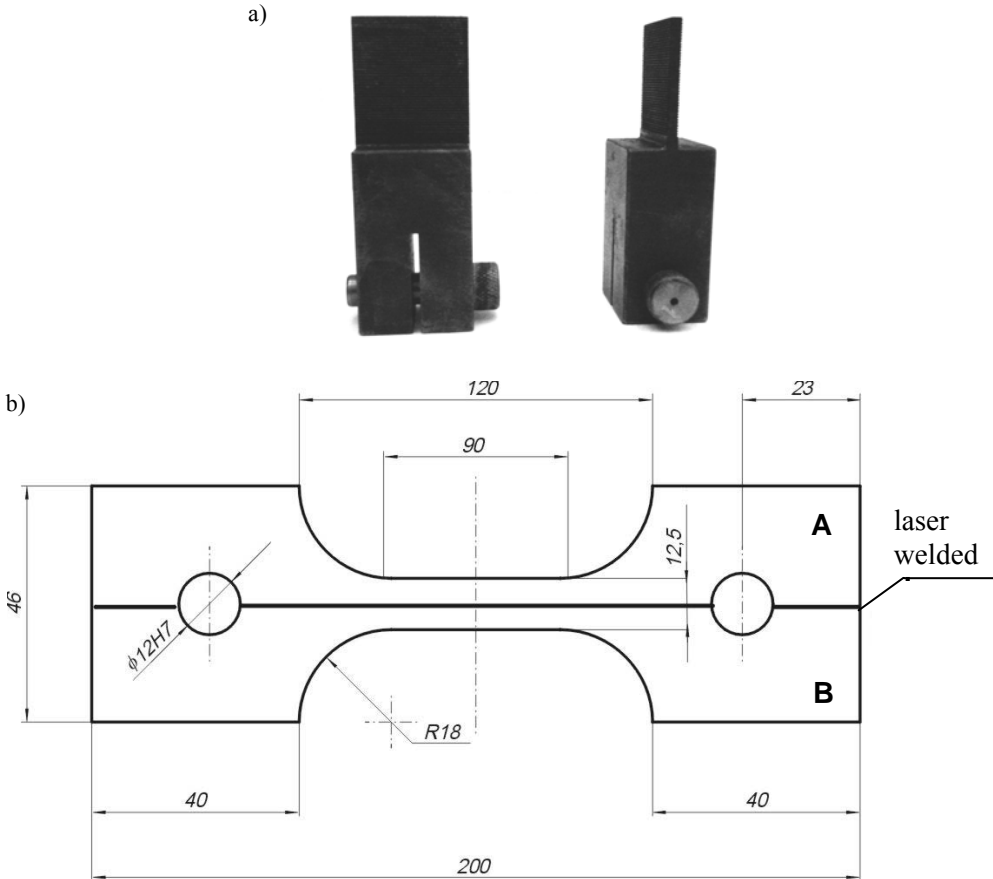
Photograph of the fixture (a) and diameters of the sample with the hole, (b) the sample was cut out from a laser-welded tailored blank used in tensile test
